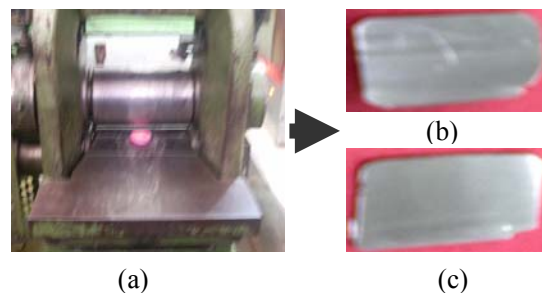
Hot-rolling process of ZrNbMoGe plate; (a) rolling machine and (b-c) rolled plate.
